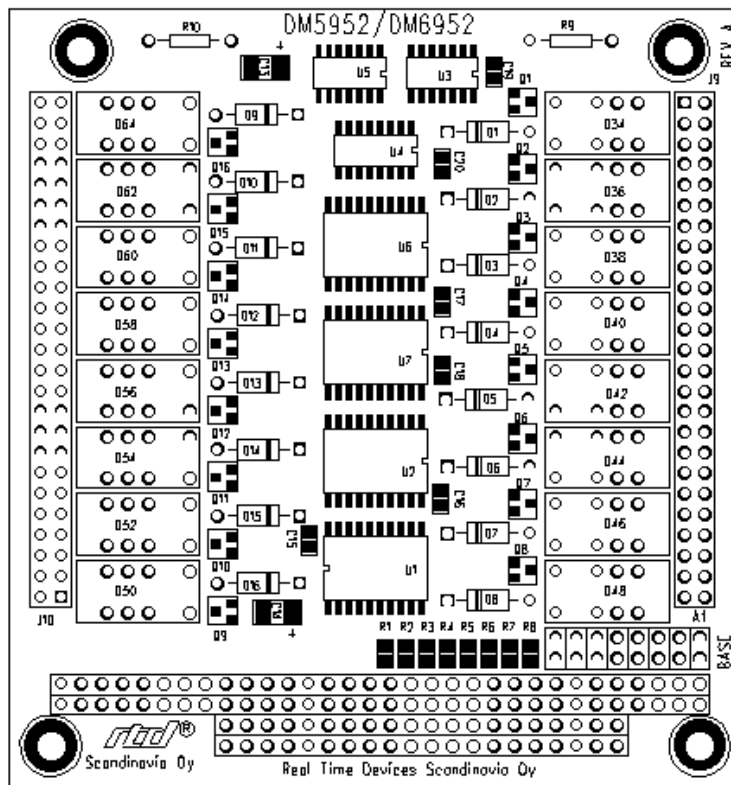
Board layout showing jumper locations (Figure shows DM6952 board)
